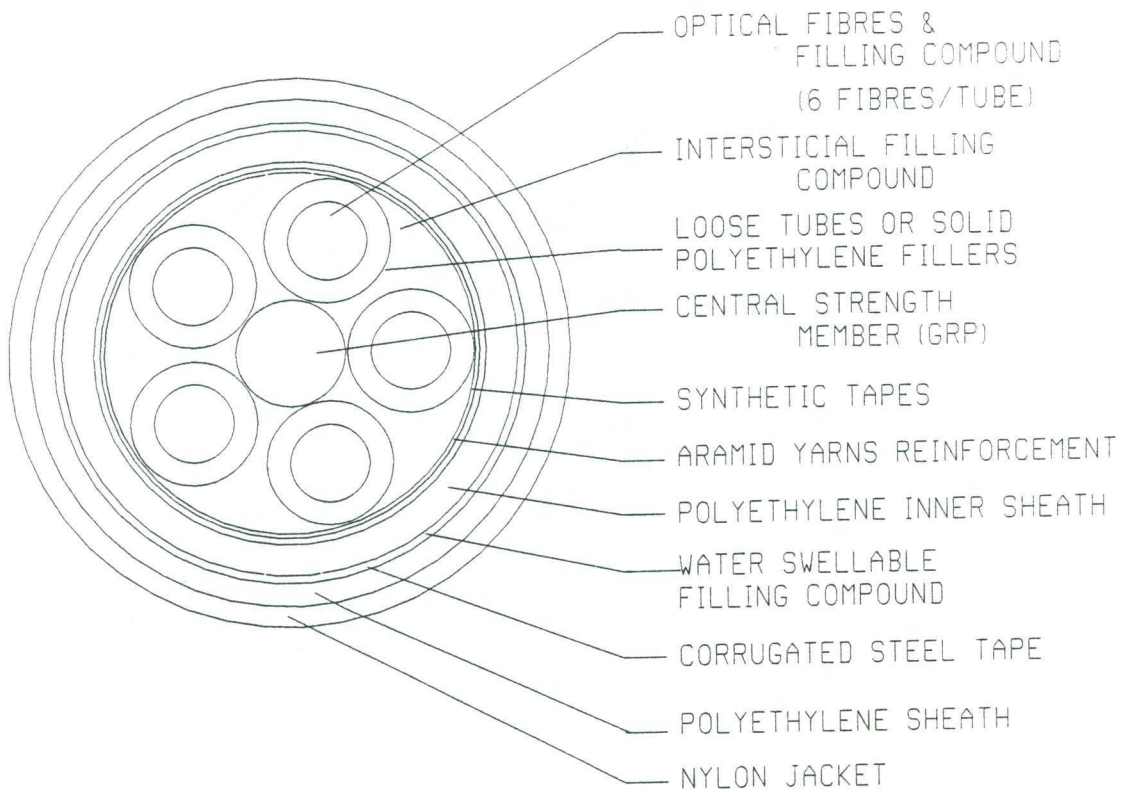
Example of Loose Tube Rodent Proof Cable.
